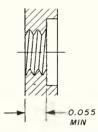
Open type shutter cable socket with straight (American) thread.
